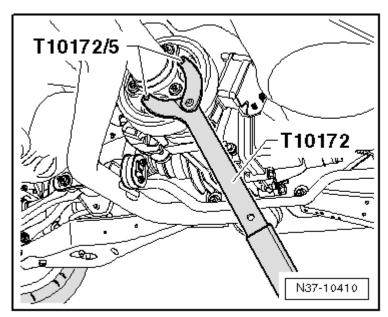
Counterholding Rear Final Drive To Loosen/Tighten Rear Flexible Disc Bolts Courtesy of AUDI OF AMERICA, LLC
